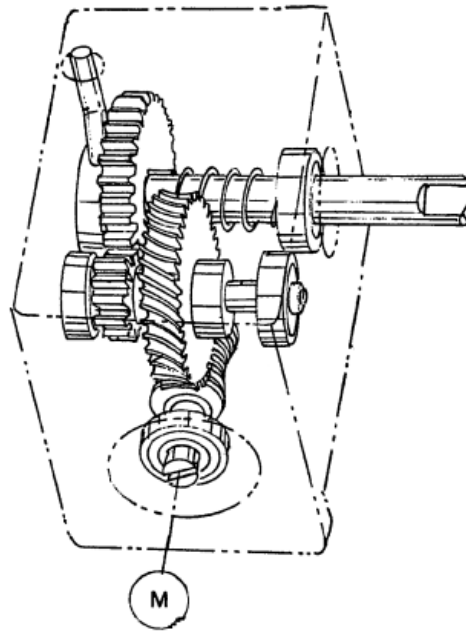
TYPICAL EP WHEELCHAIR GEAR BOX WITH M INDICATING WHERE A DRIVE MOTOR IS ATTACHED
